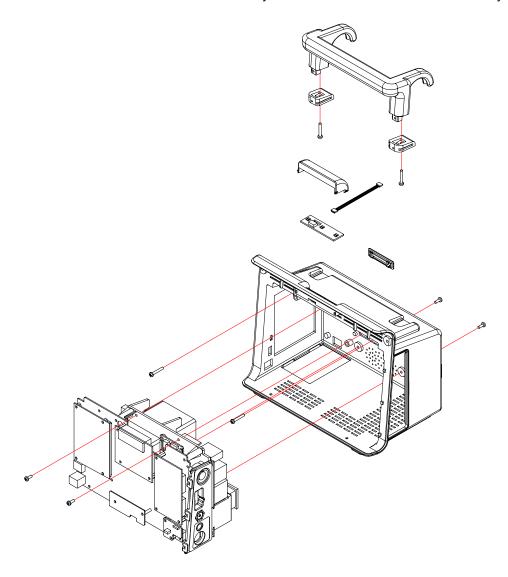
Rear Case Disassembly - Handle, Alarm LED Board, Alarm Window, Inner Case
